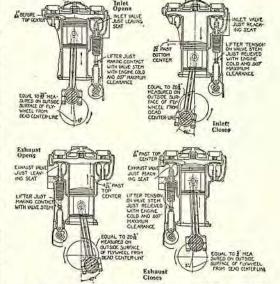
The valve timing of Locomobile "48," Series 19,000, showing the relative position of piston to the opening and closing of valves.
